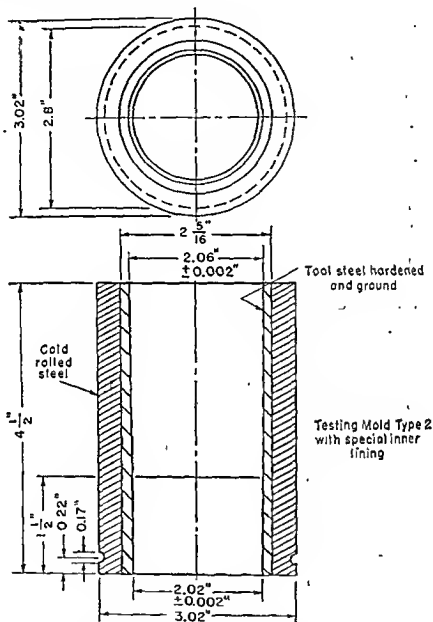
Testing Mold and Ring, Type 2. (Courtesy ASTM.)
